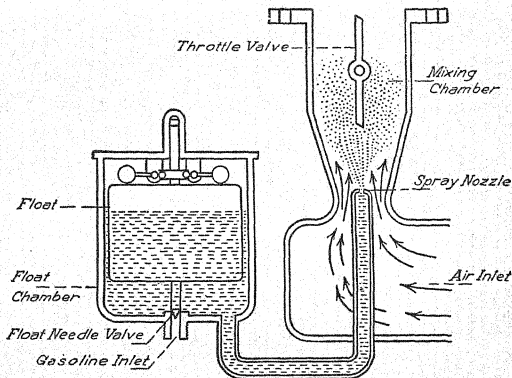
Sectional view of a simple form of carburetor, showing float chamber and mixing chamber.
